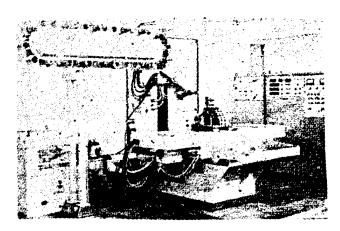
Experimental prototype of horizontal machining center FXF 50NM
